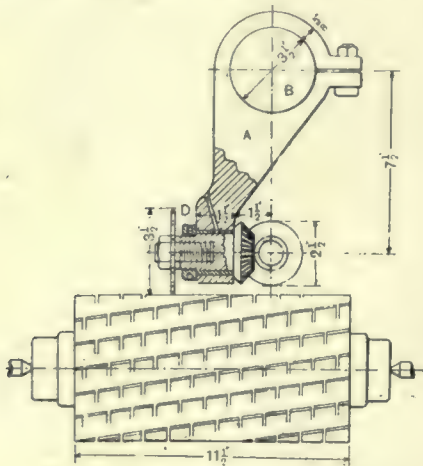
Cheap Attachment for Universal Miller.—Fig. 2.
